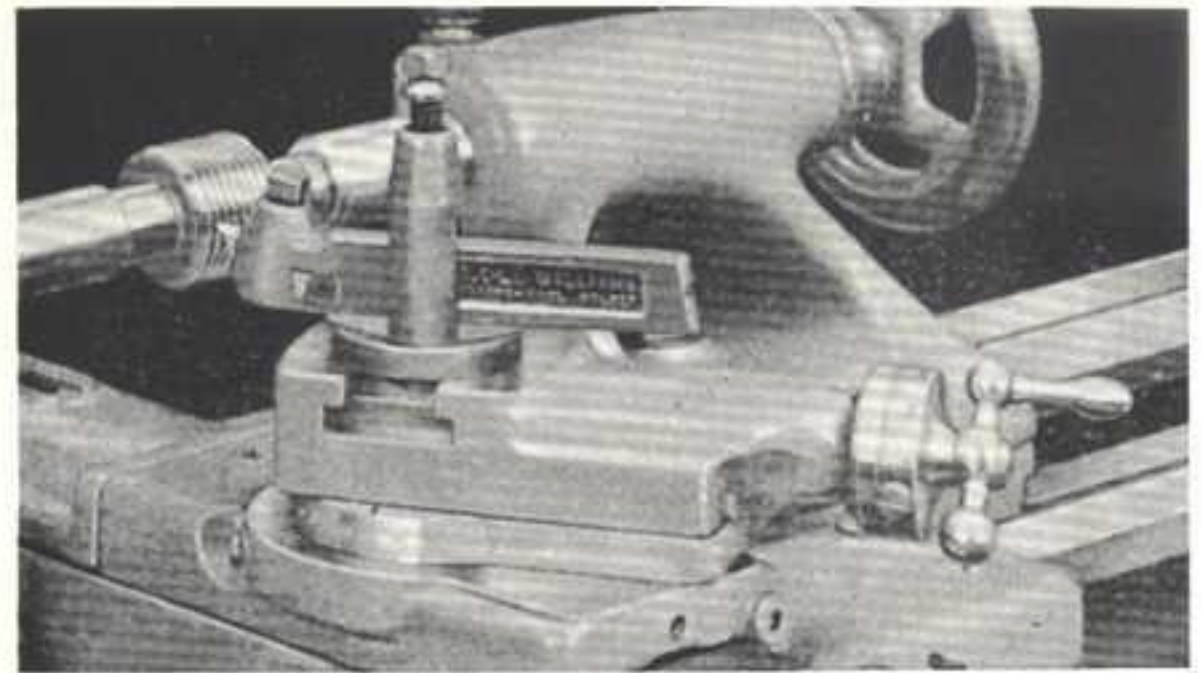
Compound Rest Set at 29° Angle for Cutting 60° Screw Threads
